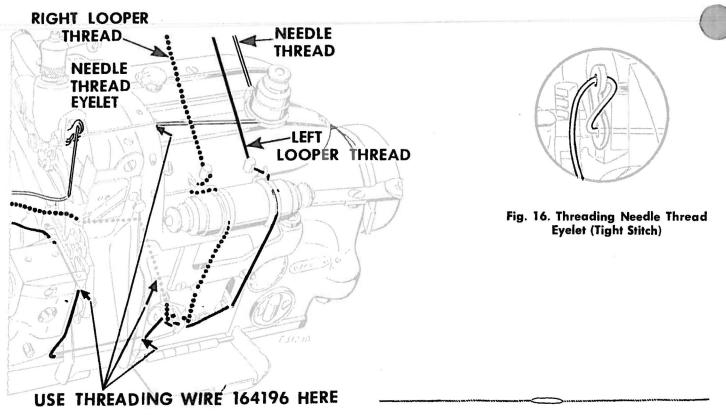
Threading the Machine (Three-thread Tight Stitch)
